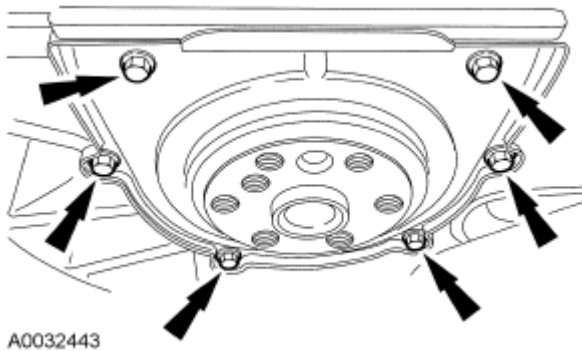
Locating Bolts & Rear Crankshaft Seal
